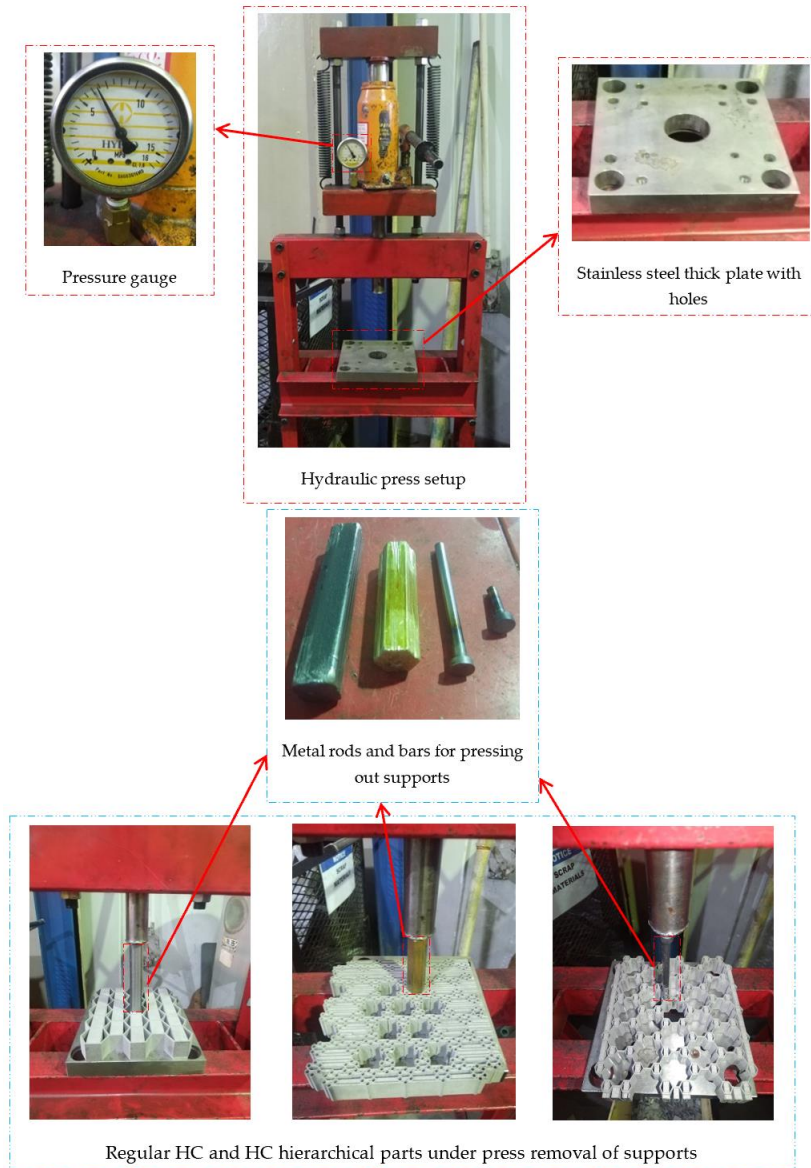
The setup used for pressing out supports in hierarchical HC parts
